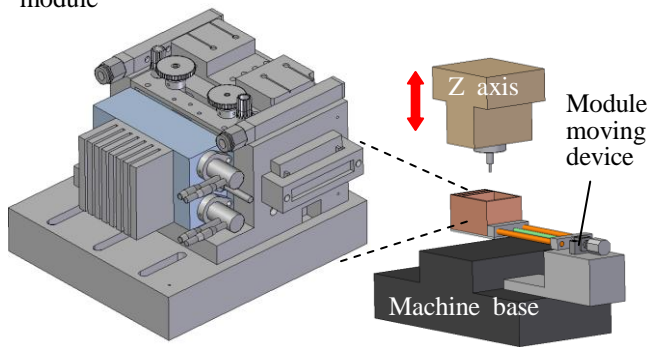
The in-situ manufacturing module could be added upon suitable machine
